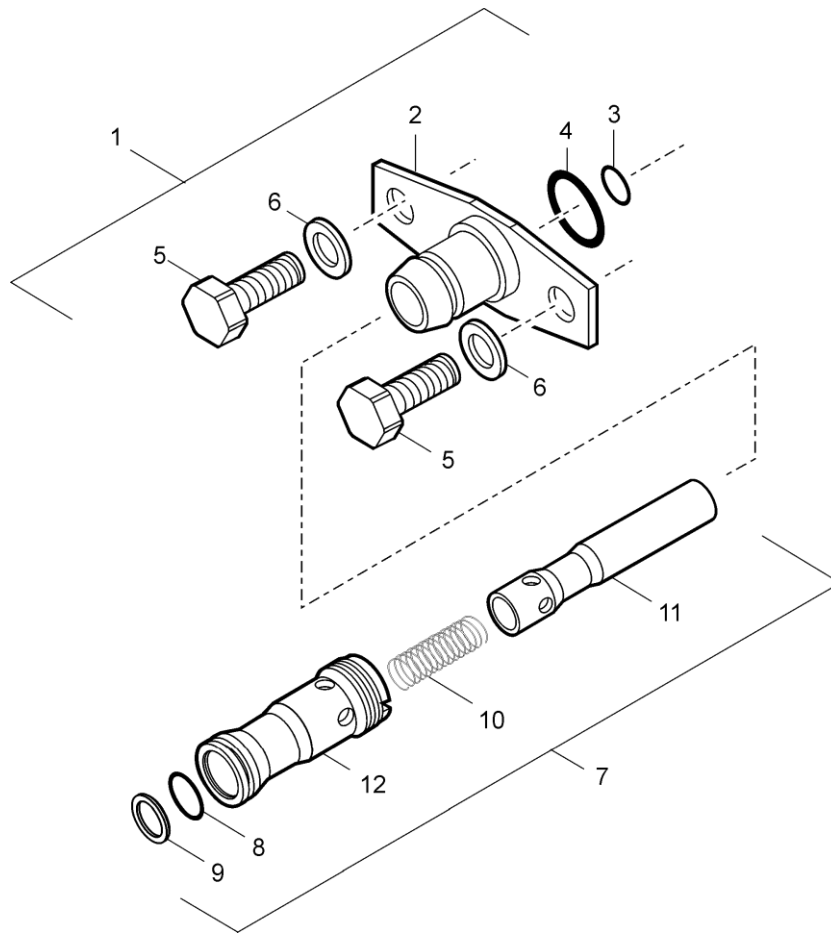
AIR/FUEL PILOT VALVE CONNECTOR ASSEMBLY – OPTION “X”
